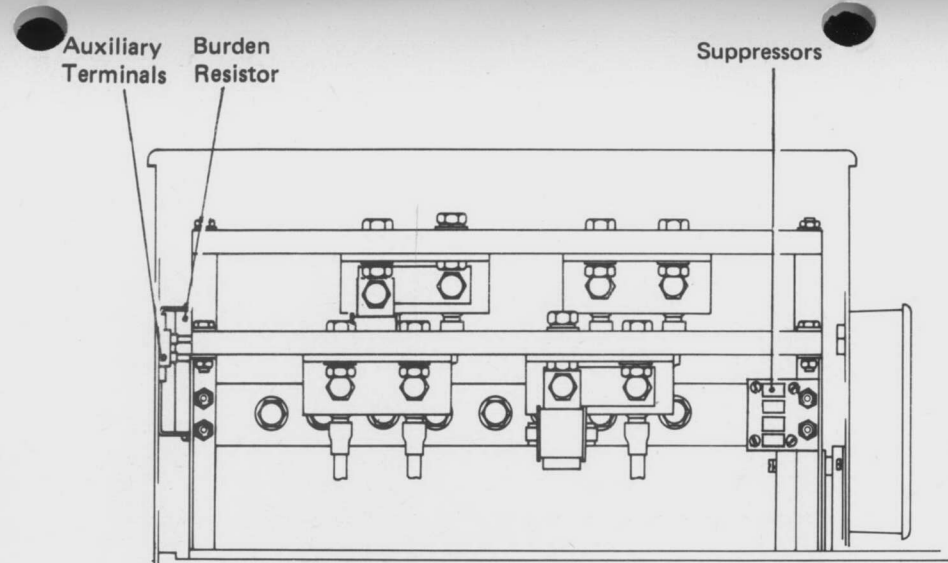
Frames 4 and 5 Accessory Location Drawings
